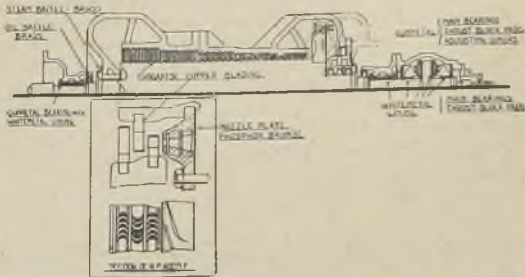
SECTION OF MARINE H. P. TURBINE.
